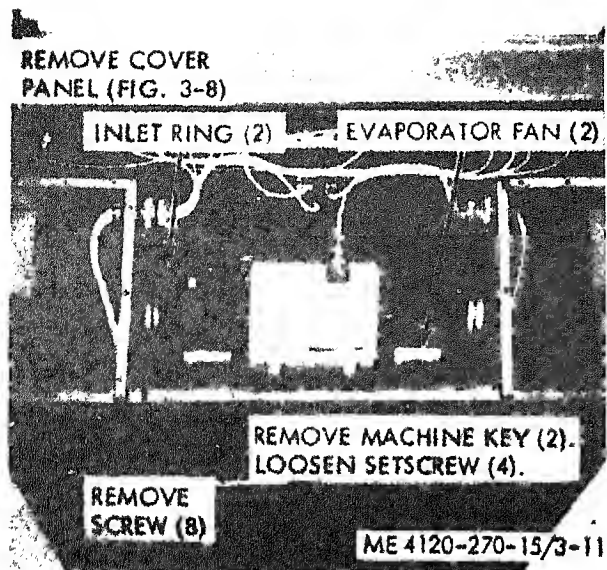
Evaporator fans and inlet rings, removal and installation.
